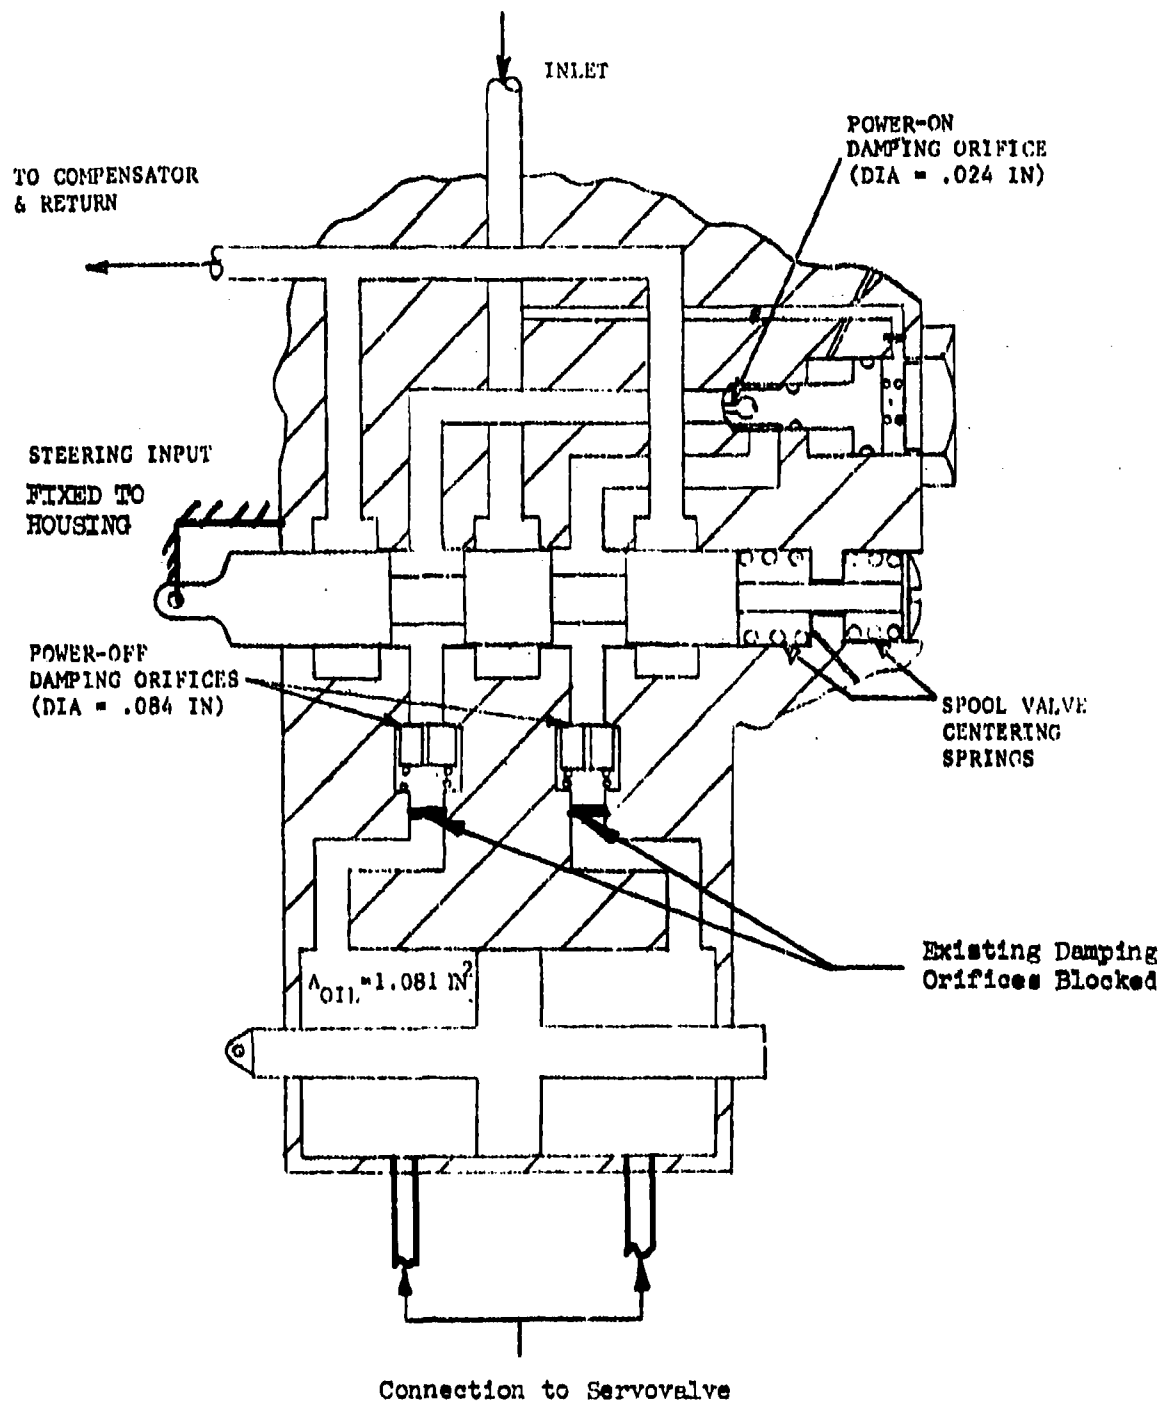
STEERING CYLINDER SCHEMATIC
